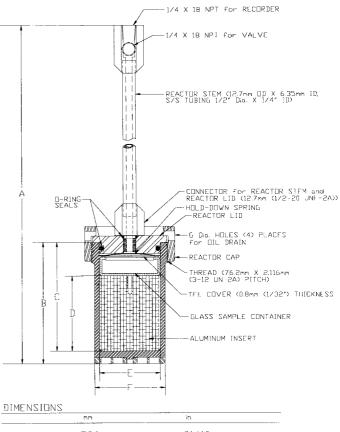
Schematic Drawing of an Assembled Vessel, Aluminum Insert, and Glass Sample Container
